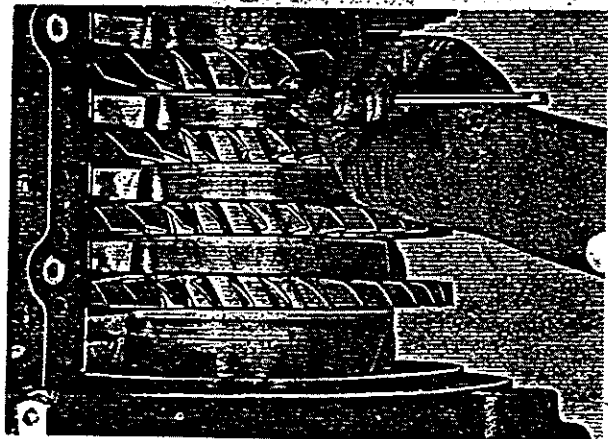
Checking Clearance Between Rotor Blades and Vane
